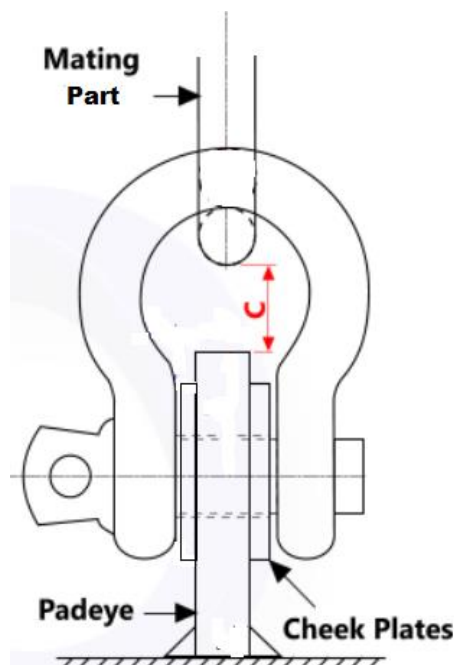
Drawing of a typical pad eye and shackle assemble, showing cheek plates, clearance between pad eye and shackle body and the clearance for adjoining component. Note C is a variable dependant on the size of the adjoining component, but must be sufficient to allow free movement.
